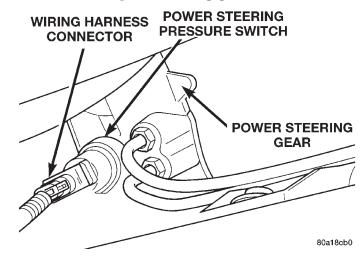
Power Steering Pressure Switch Location On Steering Gear
